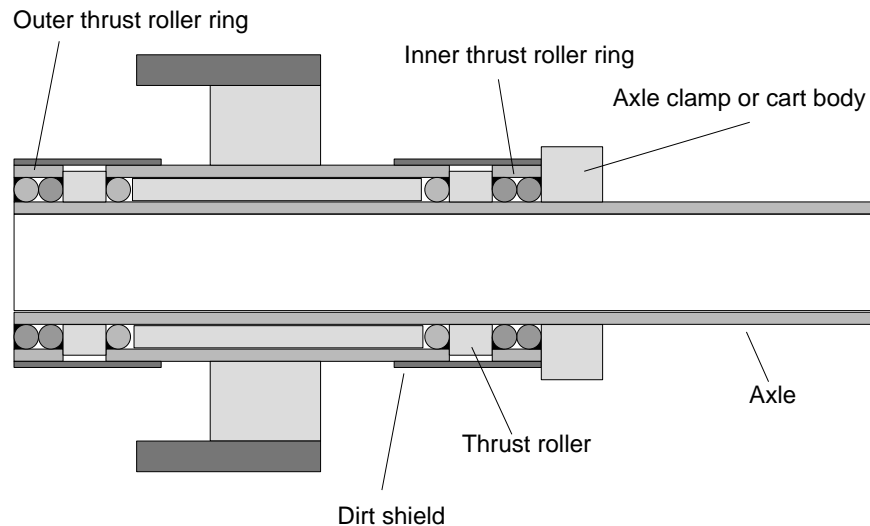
axial restraint rollers held inside dirt/ oil shields.
